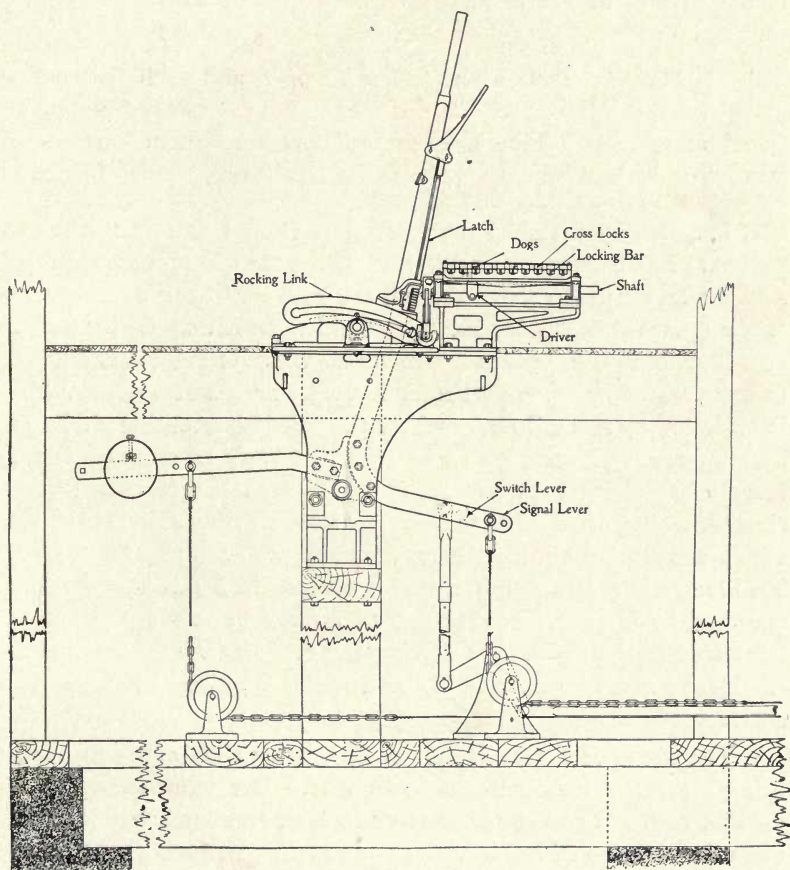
END VIEW OF SAXBY AND FARMER INTERLOCKING MACHINE WITH CONNECTIONS AS LOCATED IN TOWER
